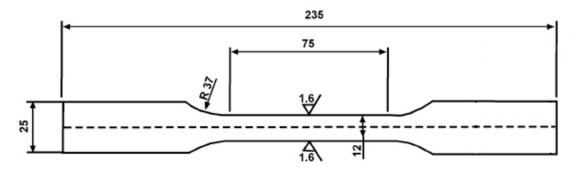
The tension test piece geometry for materials with thickness  $\geq$  3mm.
